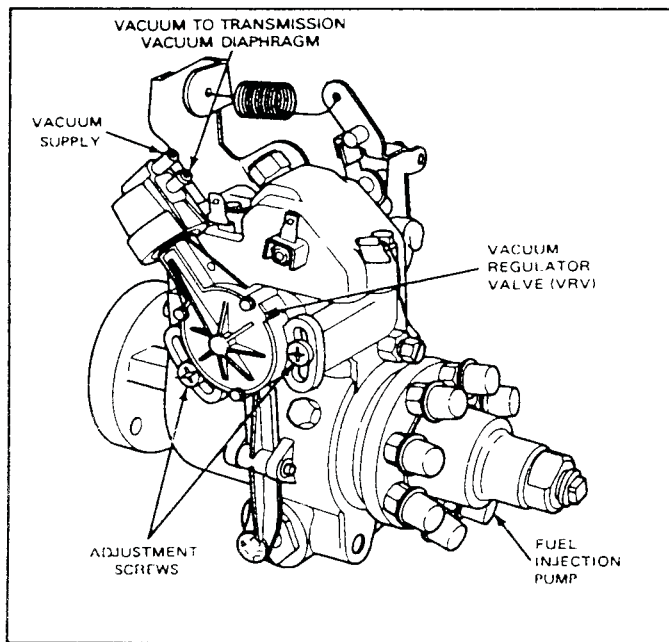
Vacuum Regulator Valve (VRV)—E-250—E-350, F-250—F-350 with 7.3L Diesel Engine
